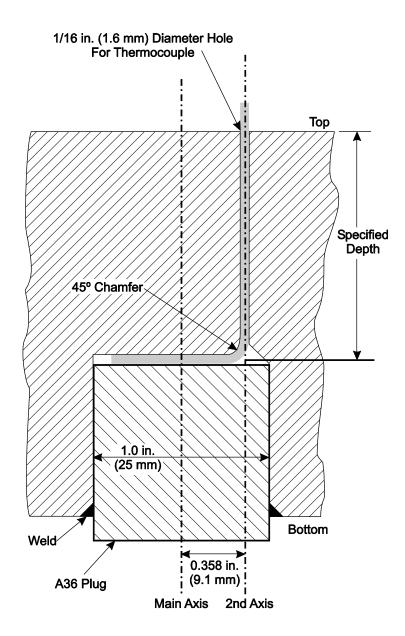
Detail of Embedded Thermocouple for Spray Cooling Test
